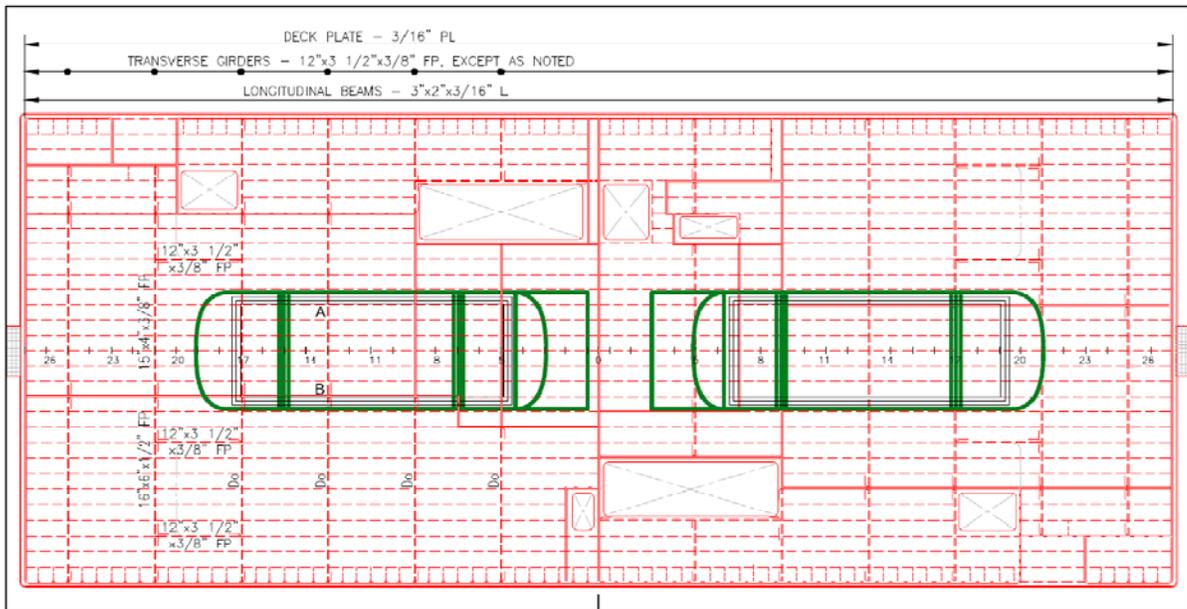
Bridge Deck Structural Arrangement of Two Tanks
